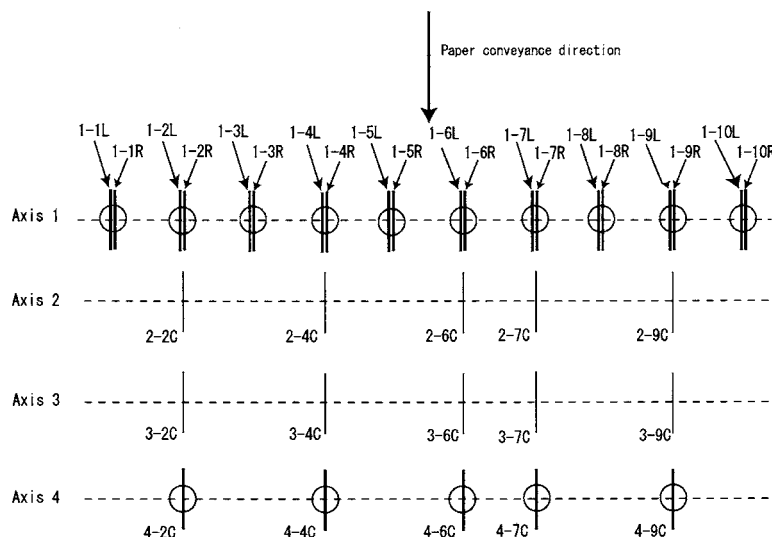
Location of spur gears and mechanical parts in the paper conveyance system of the Canon BJF800.
